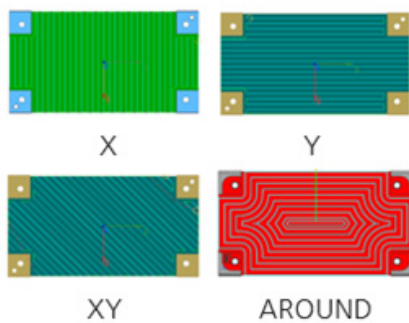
Cutting Feed Test Cases for Machining Flatness Verification
